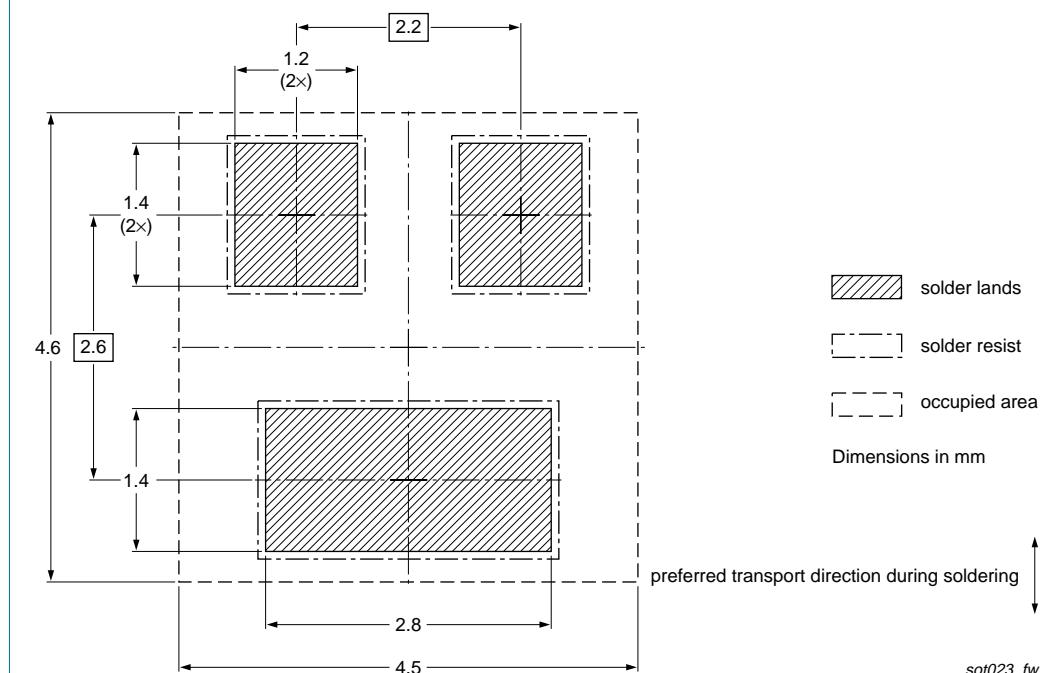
Wave soldering footprint SOT23 (TO-236AB)
